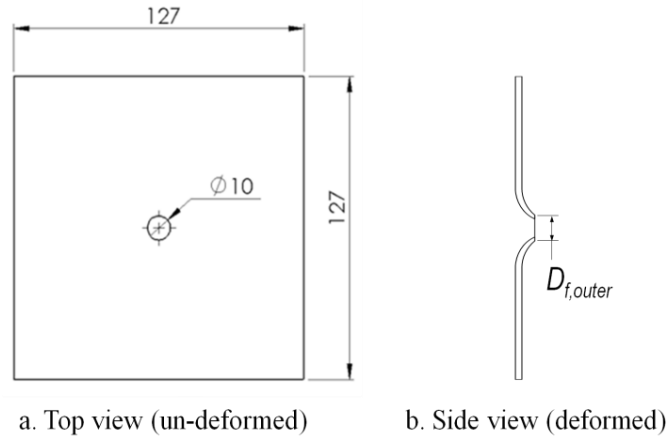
(a) Top view of un-deformed specimen geometry used for the hole expansion test. All dimensions are in mm. (b) a side view schematic of the deformed specimen indicating the outer diameter of the hole where fracture strain is measured.
